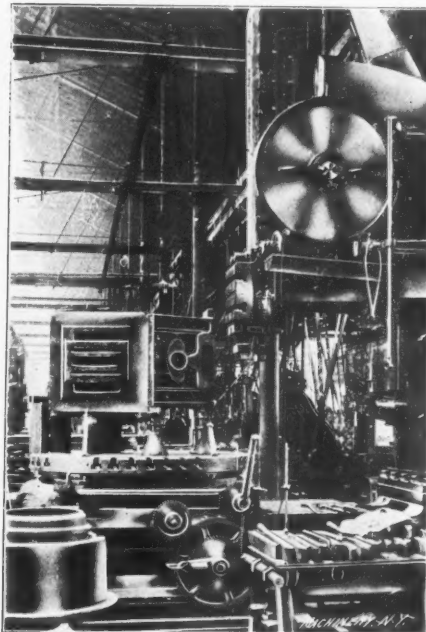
Machining a Cylinder on a Slotter—Second Position
